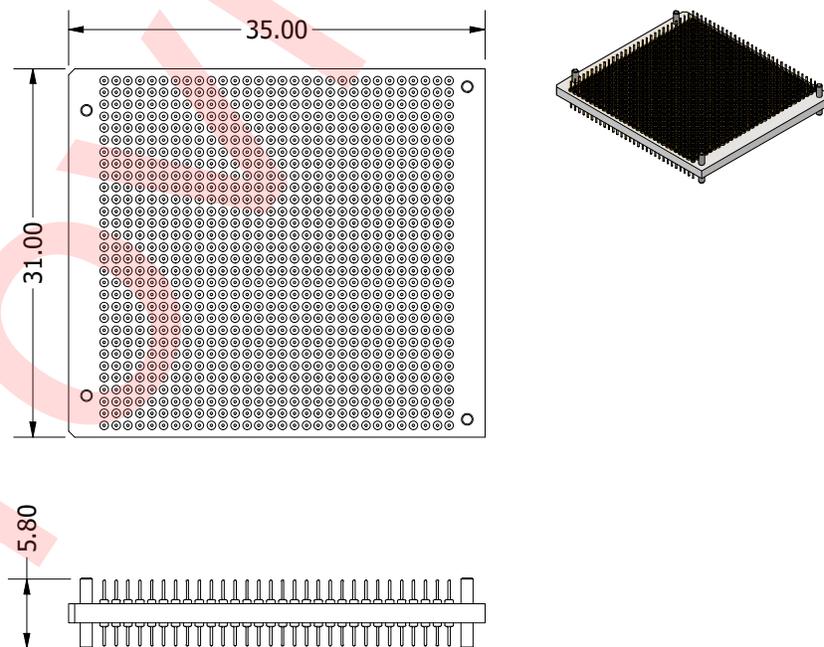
Male-Male Interposer Drawing - SCK-PACR-008
